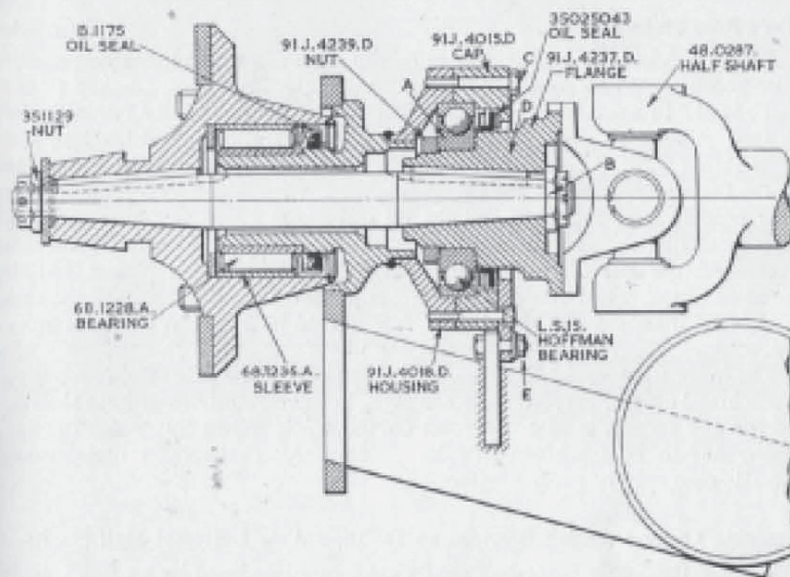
SECTION THROUGH OUTER LOCATING BEARING ON DE-DION REAR-AXLE UNIVERSAL HALF SHAFTS
